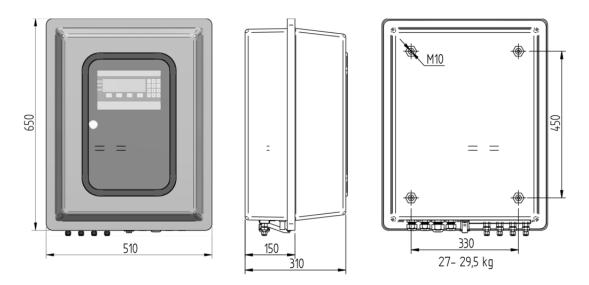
GRP protective housing (optional) - Dimensions in mm
